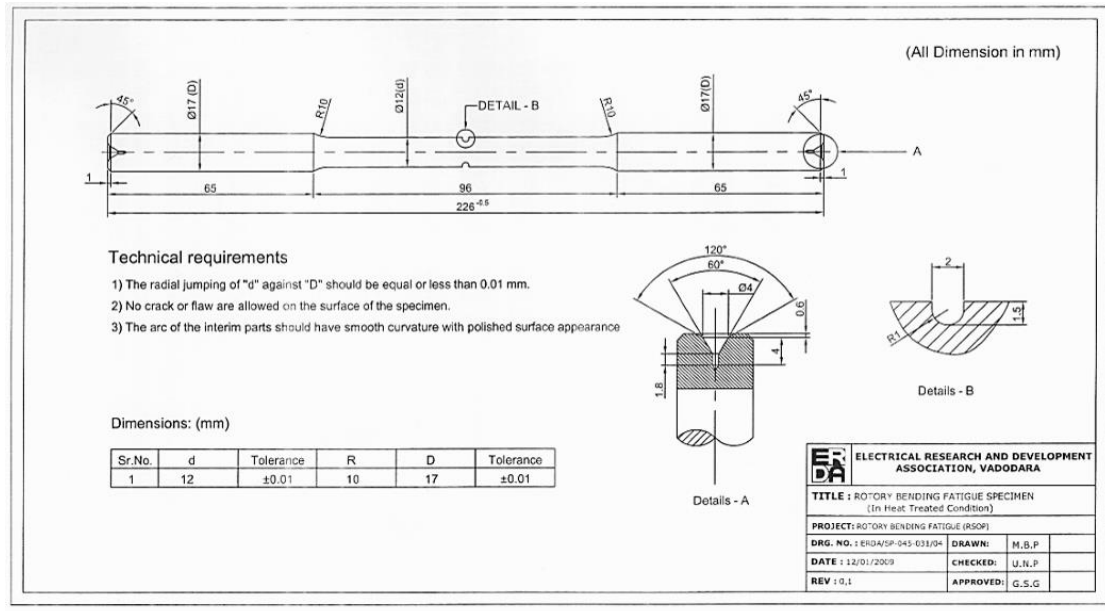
(b): Engineering drawing of the fatigue test specimen
